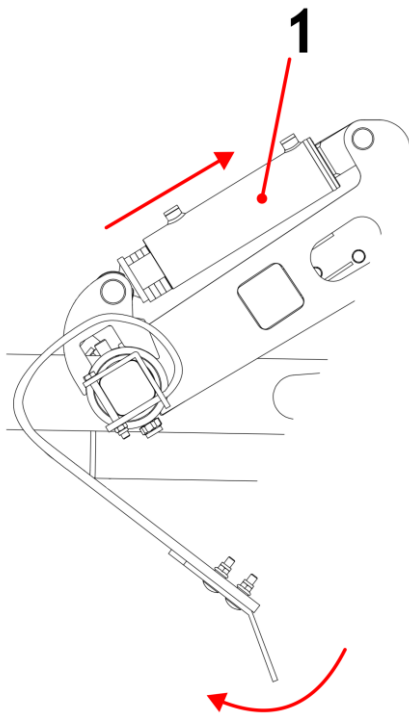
Direction of cylinder rod and tine movement during harrow folding (1 - hydraulic cylinder)
